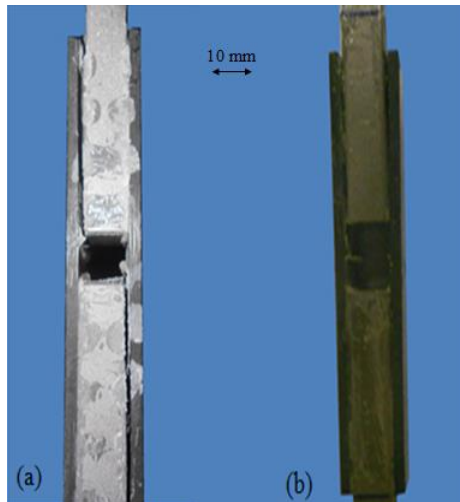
Failure Shapes: a) S-shape, b) U-Shape.
